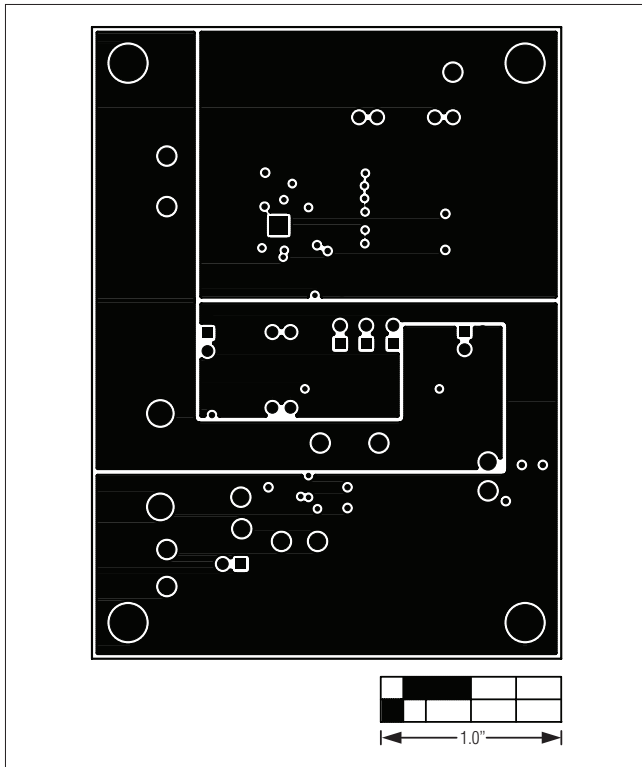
MAX14578A EV Kit PCB Layout—Power Layer 3
